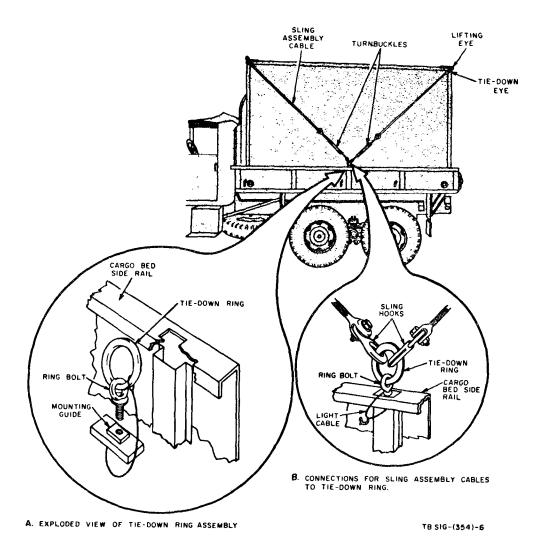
Tiedown ring assembly and sling assembly connection diagram, exploded view.
